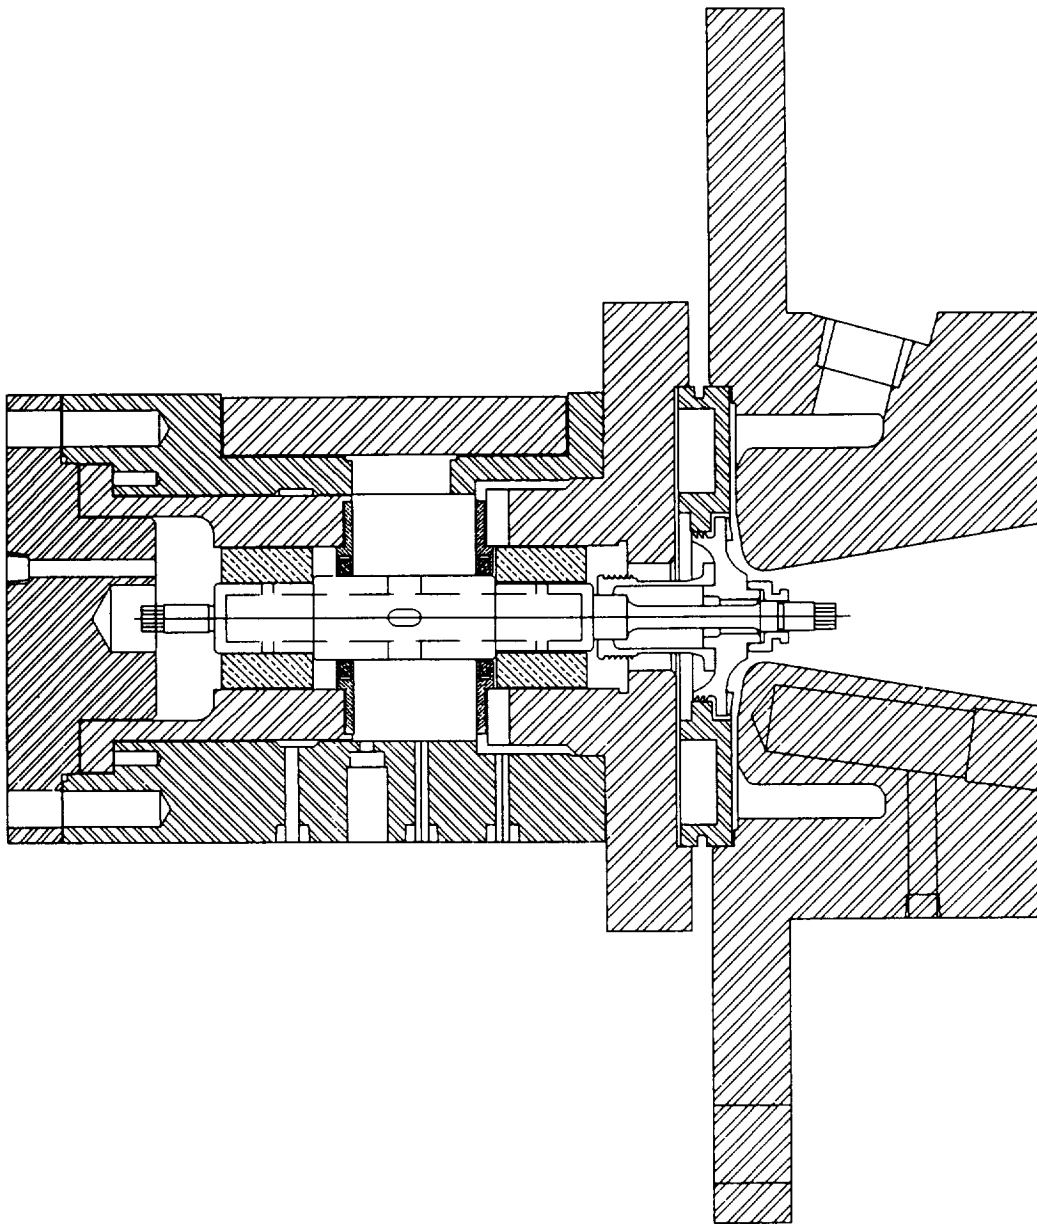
Fluid supply concept for internally fed bearing using center slot
